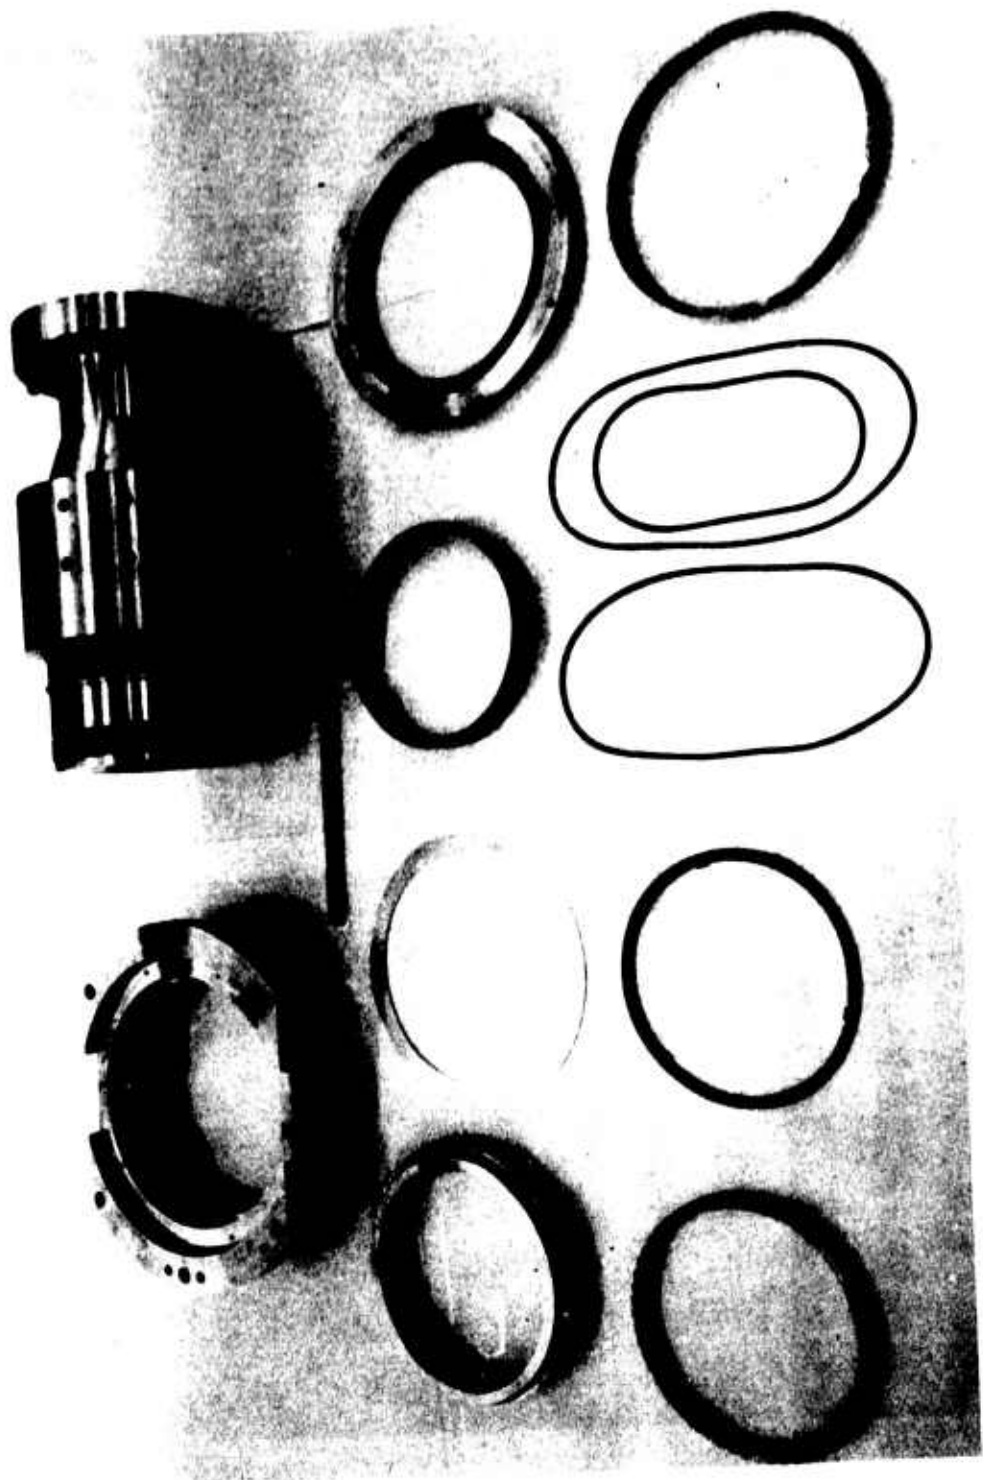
EXPLODED VIEW OF BEARING TEST CONFIGURATION
